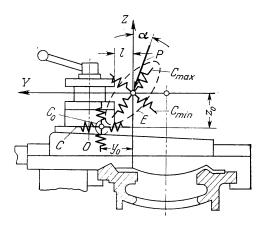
Diagram of the elastic system of a lathe carriage unit:
